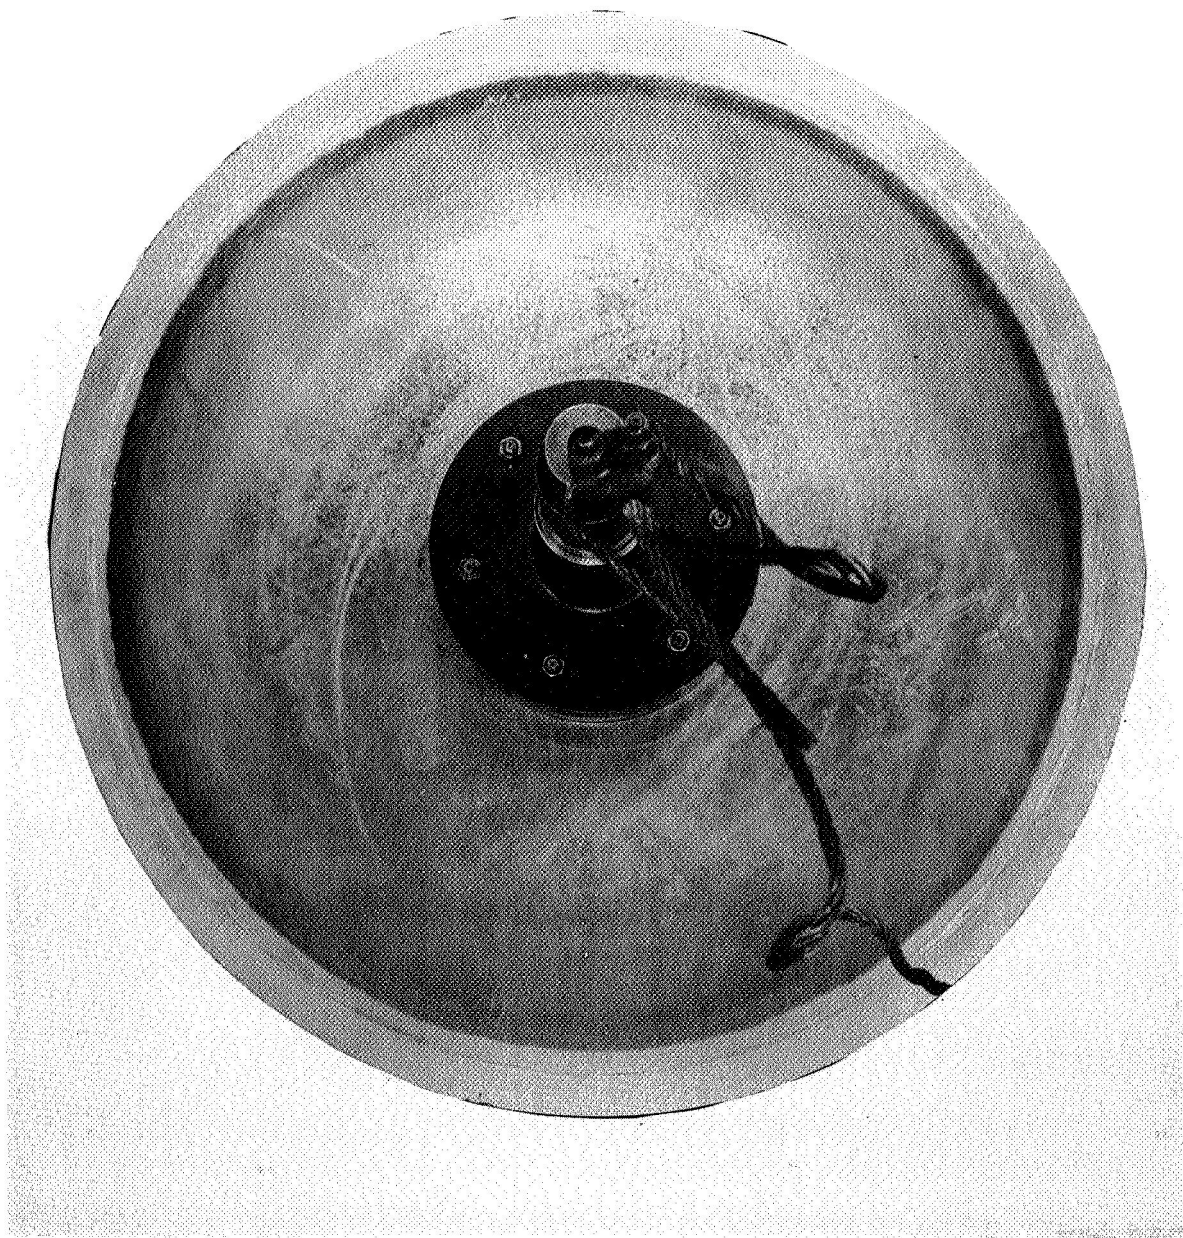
Plating Damage on Air-Bearing Disc Top Face (C680313111)
